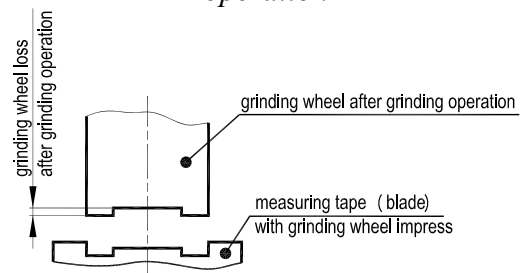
Schema of grinding wheel impress to the measuring tape and its plotting
